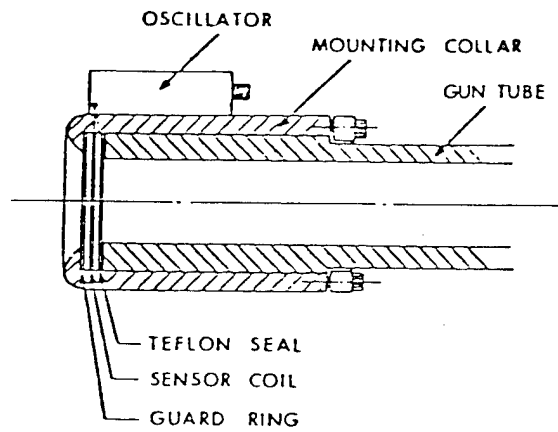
Cross-Sectional View of Sensor Coil Assembly Rigidly Attached to M-68 Gun Tube Muzzle
